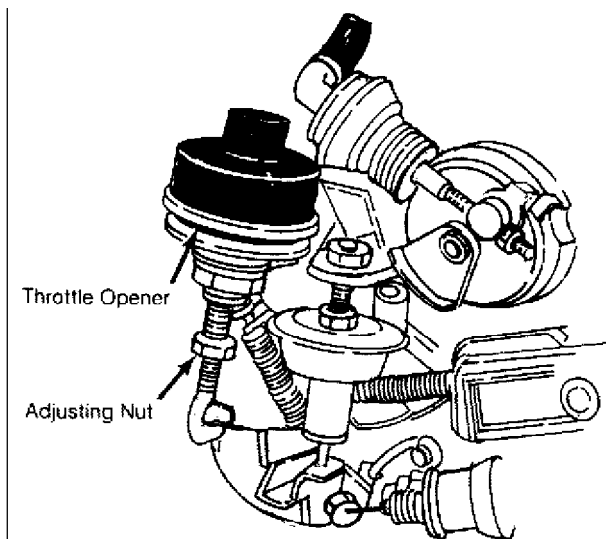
Throttle Opener Adjustment (A/C Models Only)
